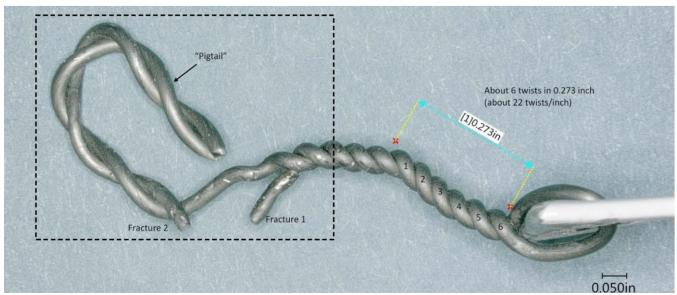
Right aileron inboard hinge attachment bolt safety wire with twist count.
